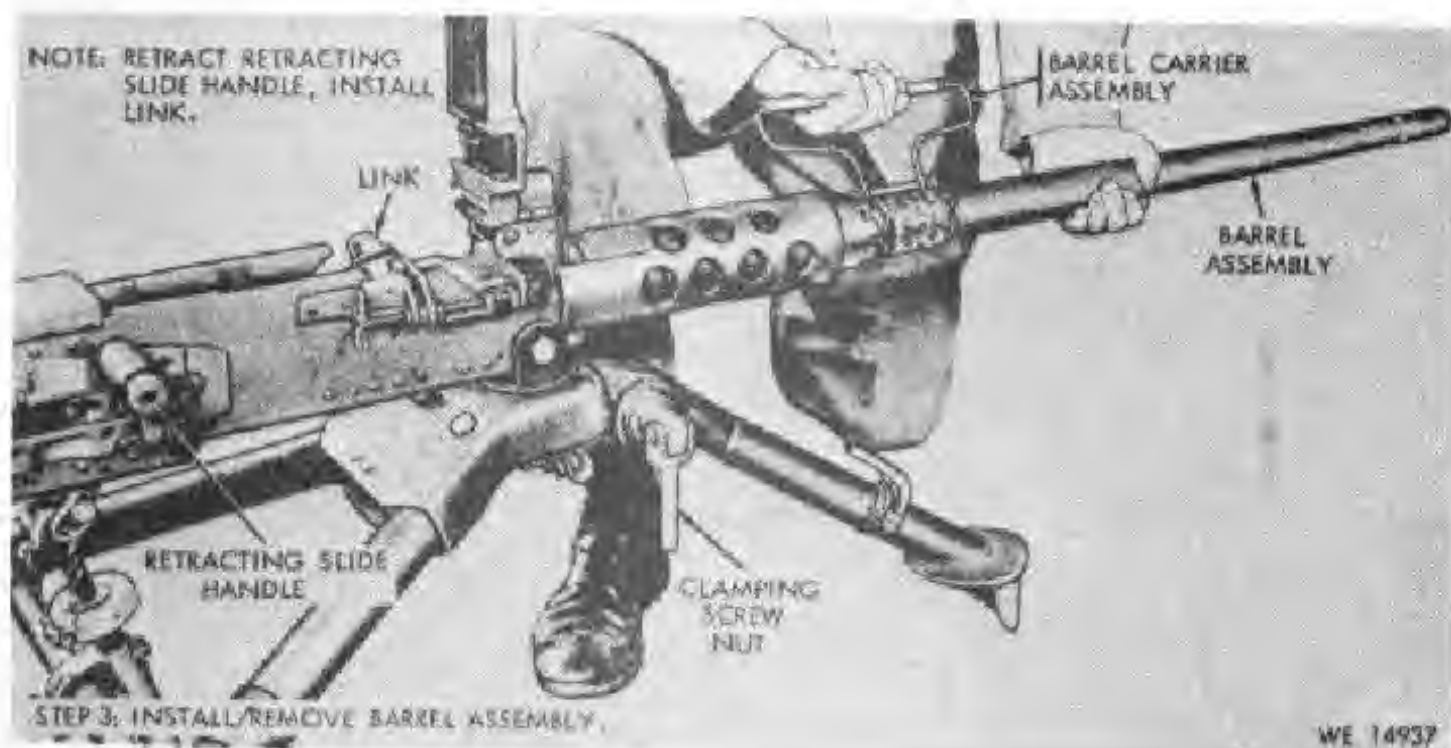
Installation/removal of machine gun on Tripod Mount, M3. (2 of 2)
